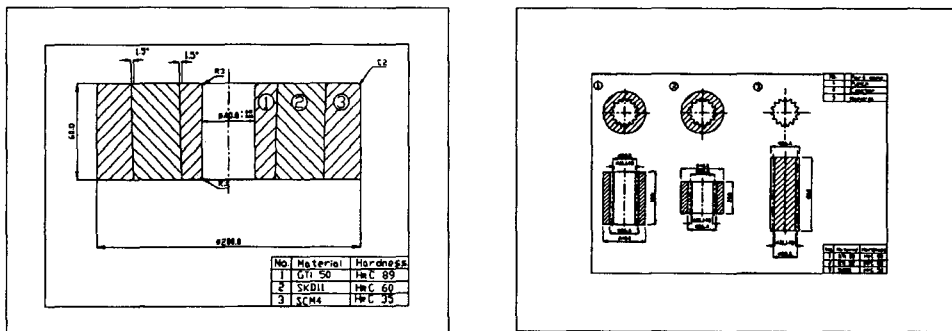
Schematic drawing of die, mandrel and punch for forging of internal spur gear with SCM 415
